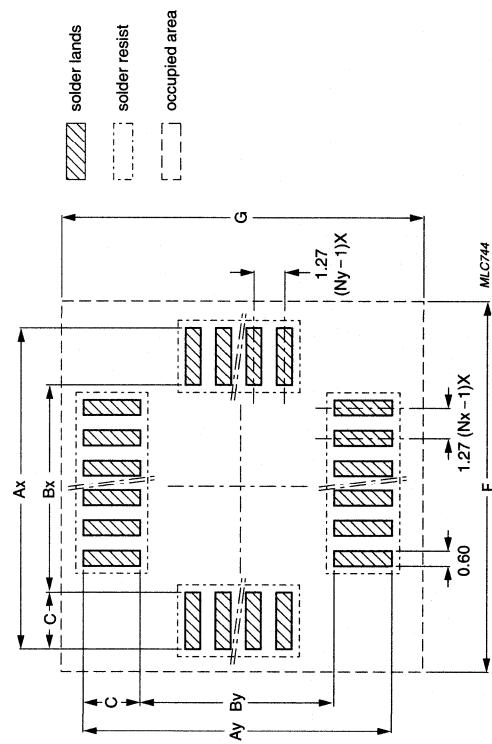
PC board footprint for mounting PLCC packages (reflow soldering).
